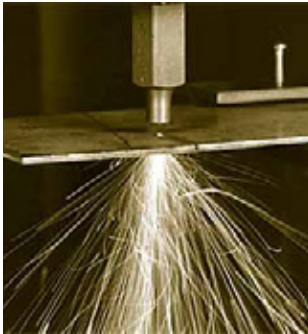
The first oxygen assisted laser cutting of 1mm thick steel sheet in May 1967
